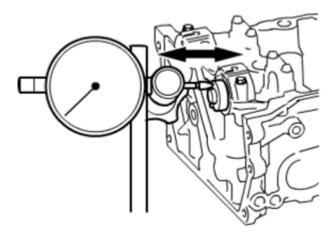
Measuring Intake And Exhaust Camshaft Housing Thrust Clearance Courtesy of SUZUKI OF AMERICA CORP.
